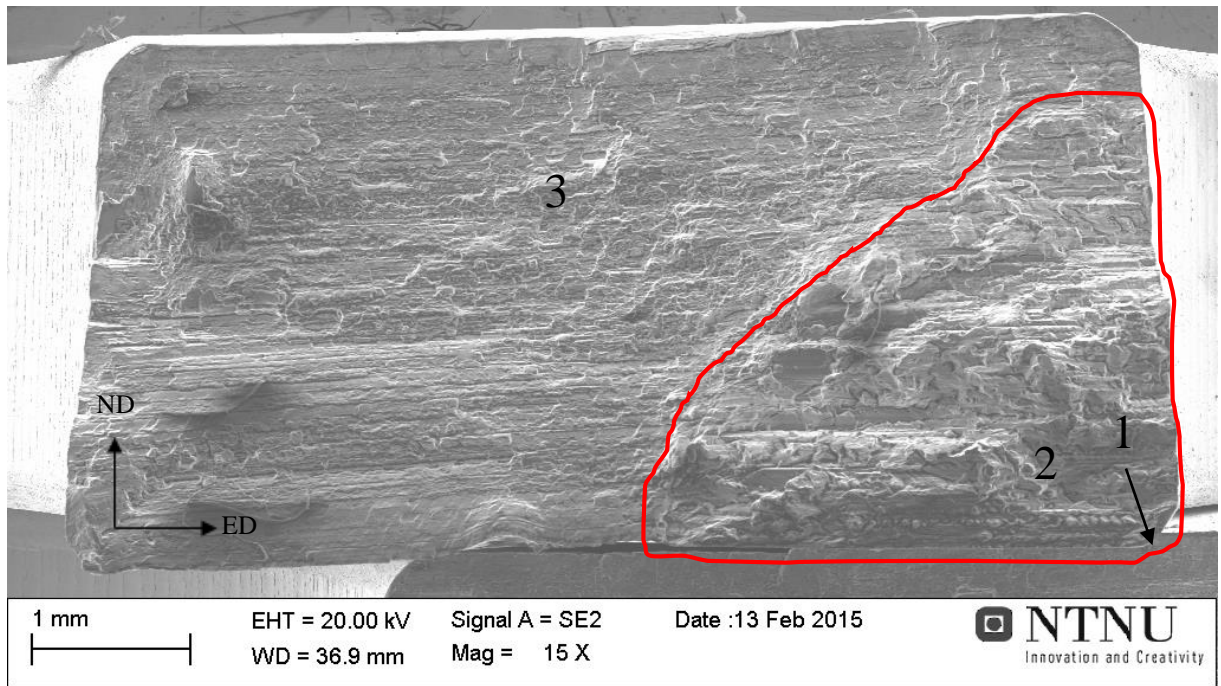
An overview of the fractured surface of AA7108 T1 with the shortest fatigue life, 15X magnification. The fatigue fractured area is enclosed by the red line.
